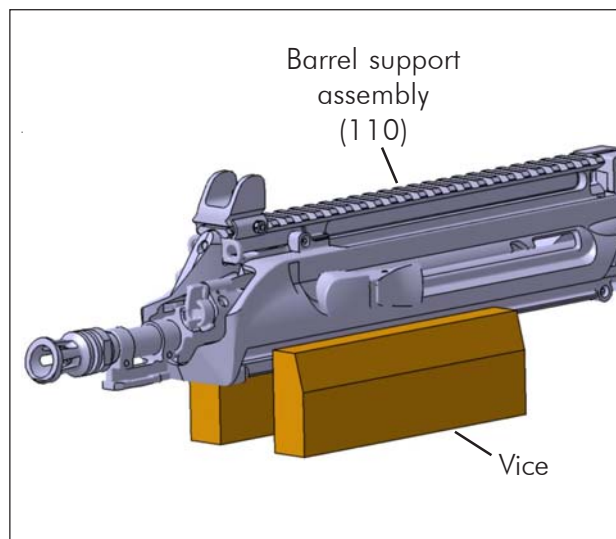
n - Installation of the barrel support assembly (110) into a vice
